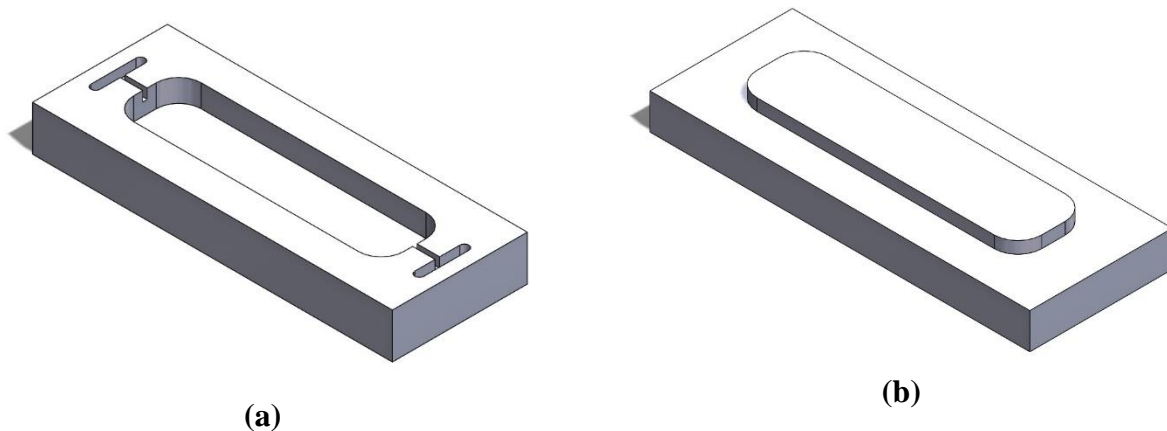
(a) Test Mold Bottom, (b) Test Mold Top
